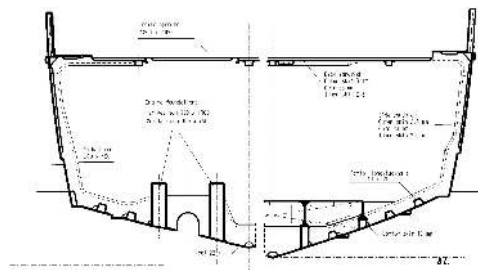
Main section of a 25 m FRP planing yacht with sides and deck in sandwich.
